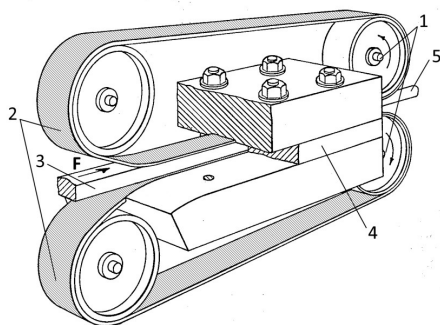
Scheme of Linex continuous pressing process: 1 – rollers; 2 – links of endless chains; 3 – workpiece; 4 – matrix; 5 - finished product [11].
